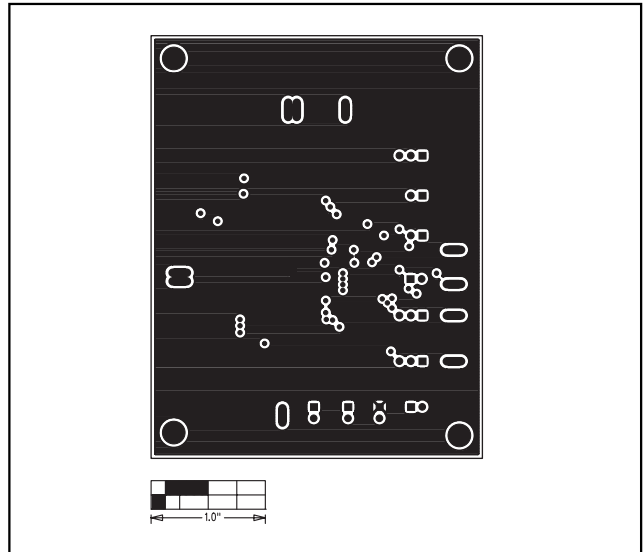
MAX1845 EV Kit PC Board Layout—Internal GND Plane (Layer 3)
